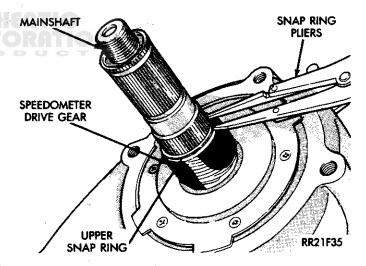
Upper Snap Ring And Speedometer Gear Removal/Installation
